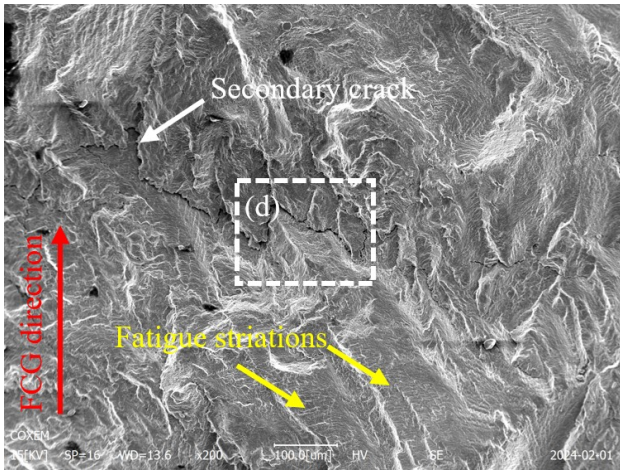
Microscopic fractographies of typical WAAM 316L specimen 316-M-0-0.1
